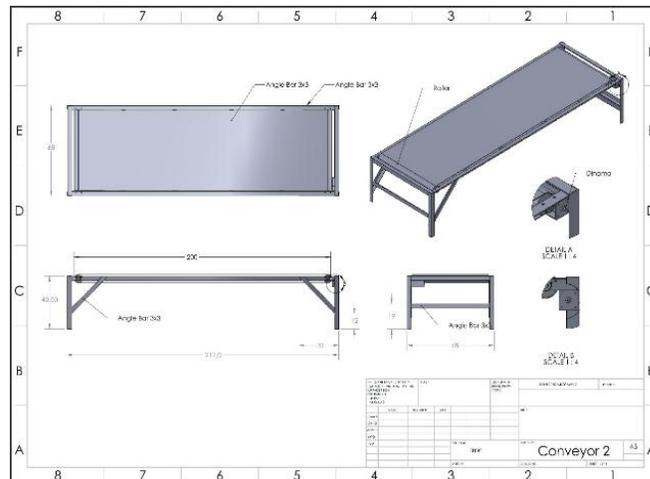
Technical drawing of the conveyor belt showing structural dimensions and roller mechanism.
